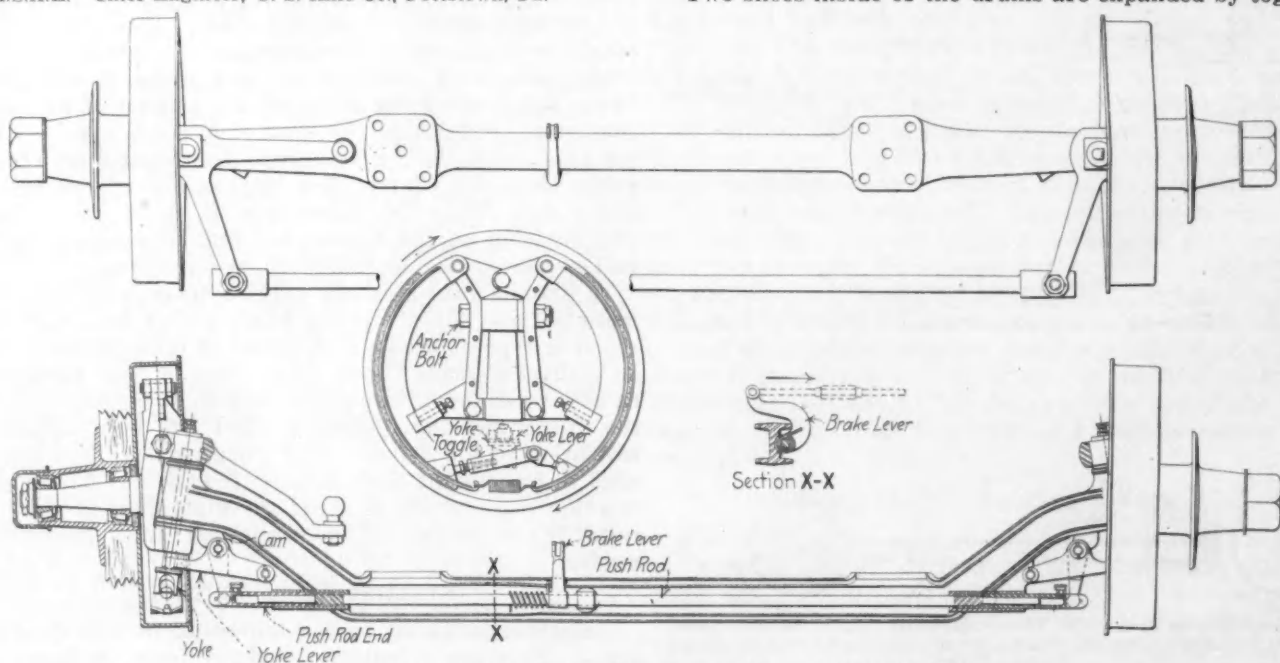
DETAILS OF A RECENTLY EVOLVED TYPE OF FRONT-WHEEL BRAKE
